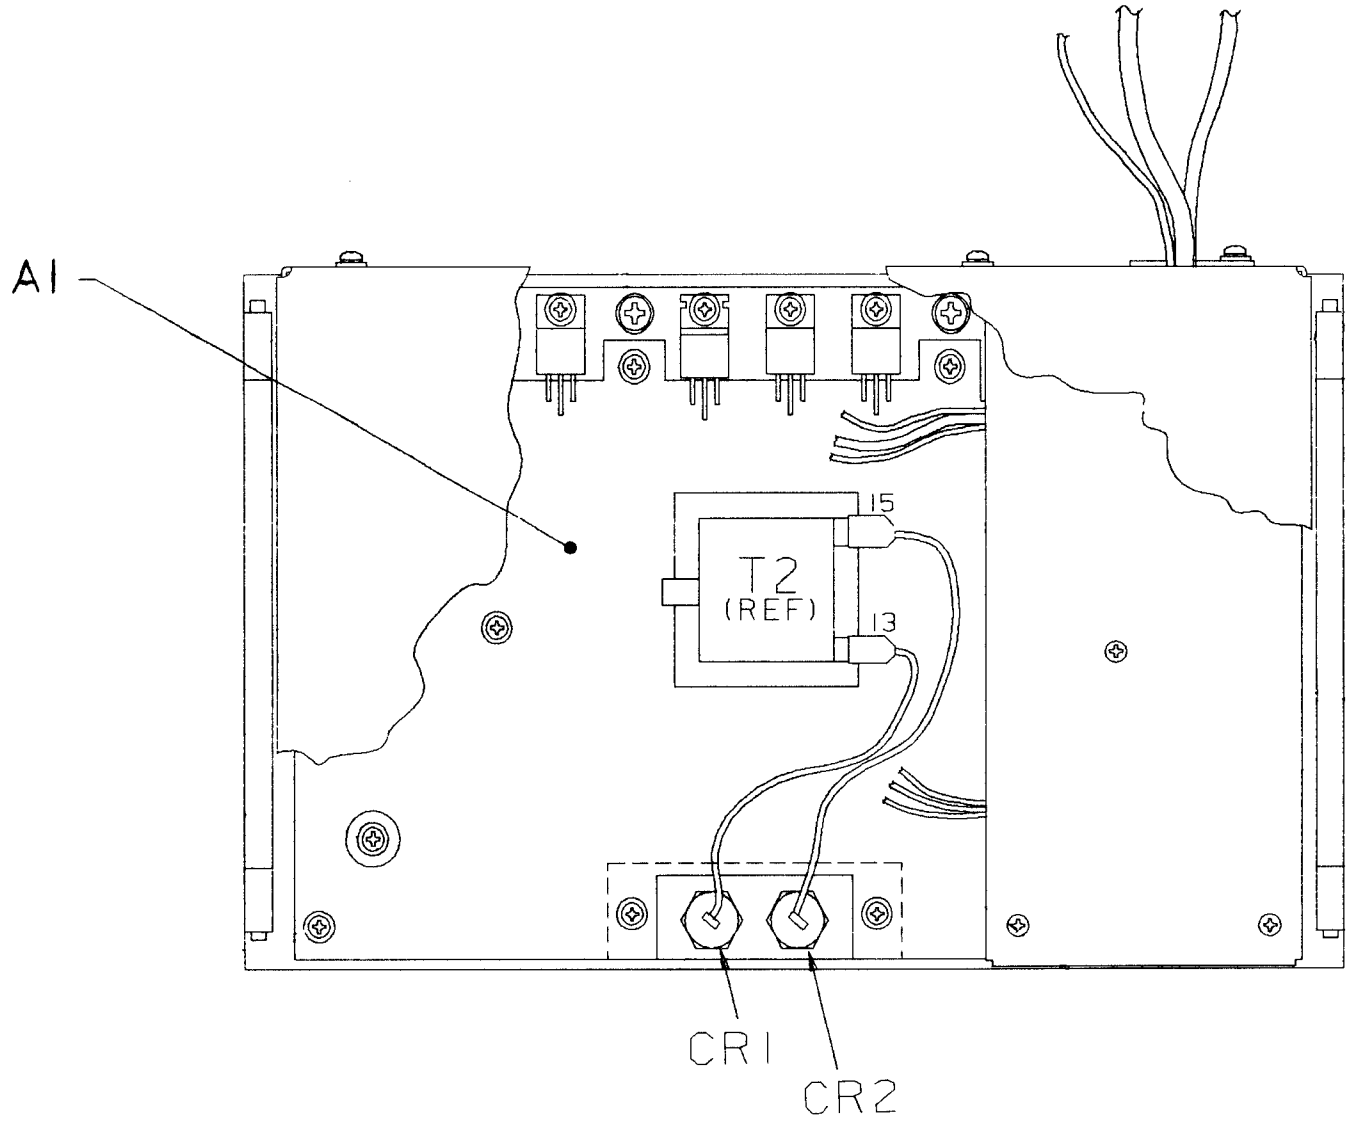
Power Supply Assembly Component Locations (10133-1200, Rev. D)
